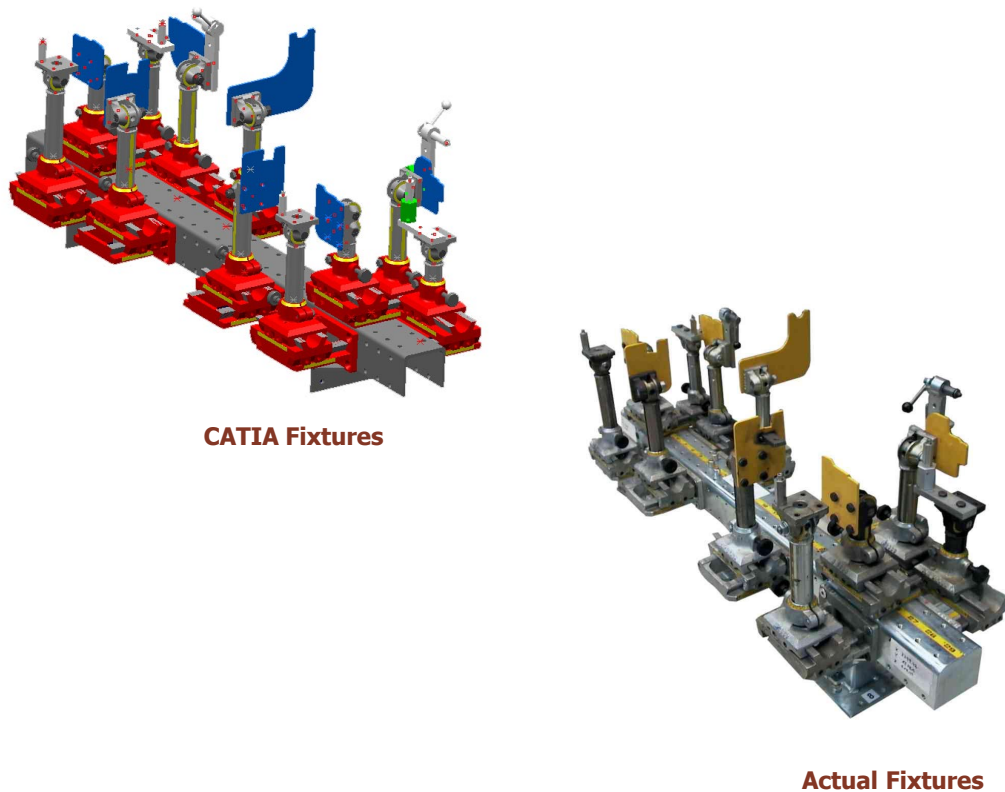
Assembly Fixtures (CAD and Actual)
